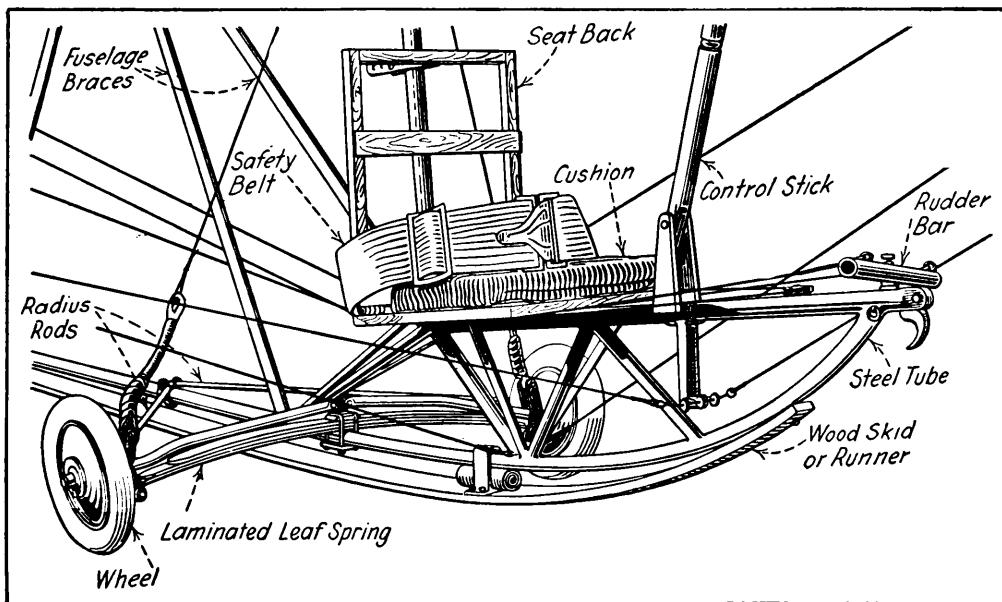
Close-up View of Front Part of the Alexander Training Glider Showing Application of Simple Wheel Landing Gear.
